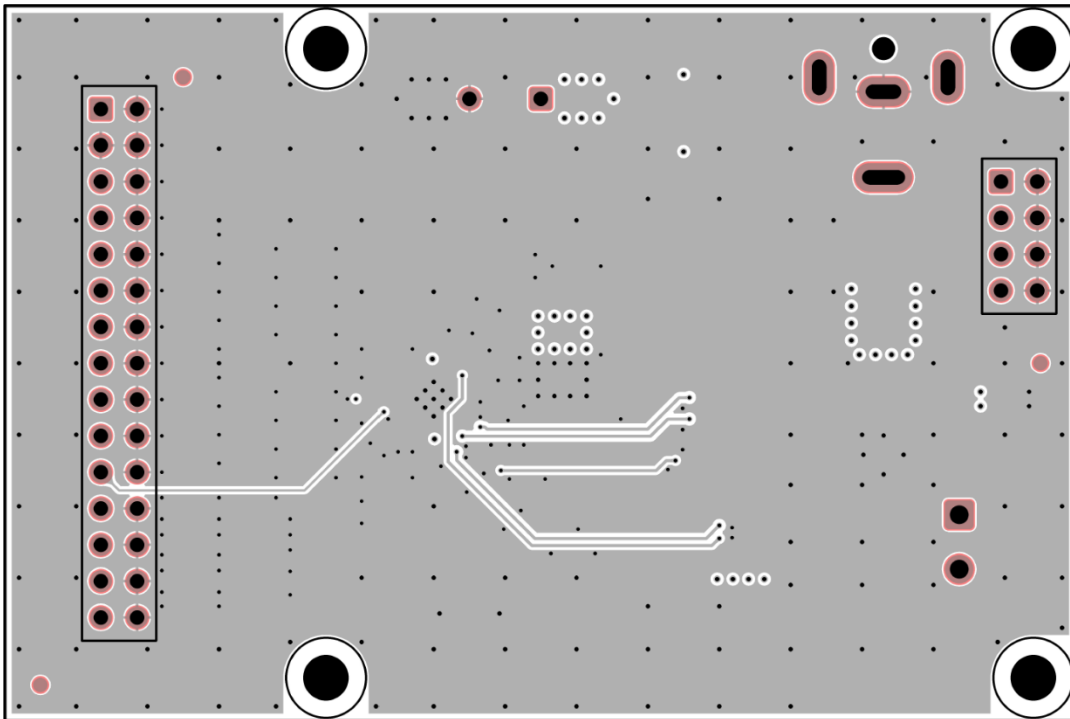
Layout view – Layer 4 - Bottom (not to scale)
